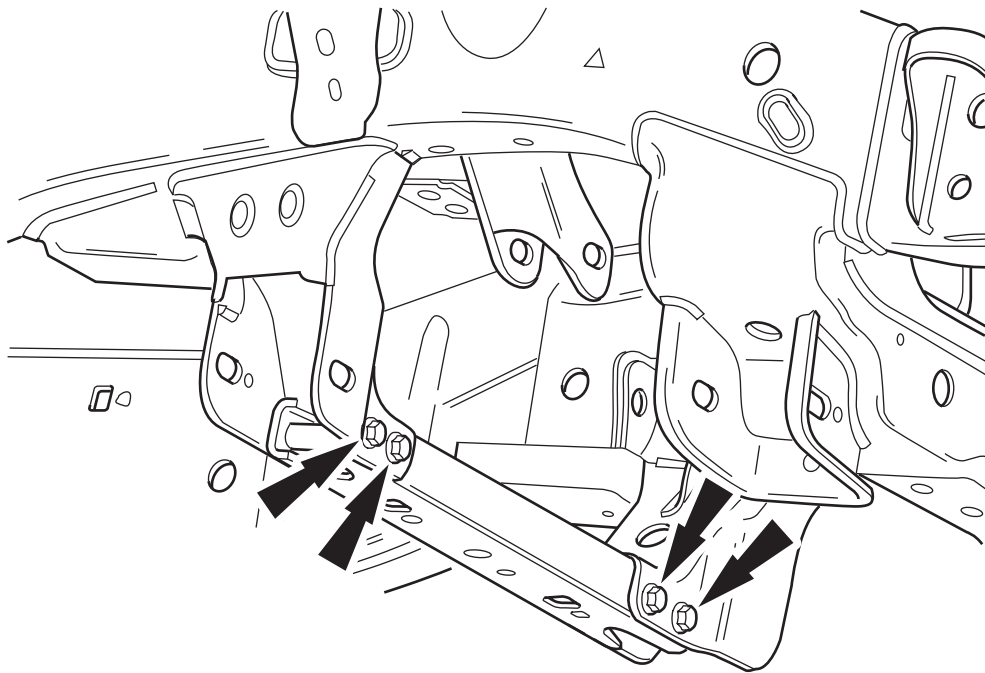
RE-INSTALL THE #1B CROSSMEMBER AND FASTENERS WITH SHIELD/SKID PLATE MOUNTING HOLES FACING THE GROUND. THE NUTS SHOULD BE INSTALLED ON THE REAR FACE OF THE #1B CROSSMEMBER FRAME BRACKETS (4X4 SHOWN, 4X2 IS SIMILAR)
